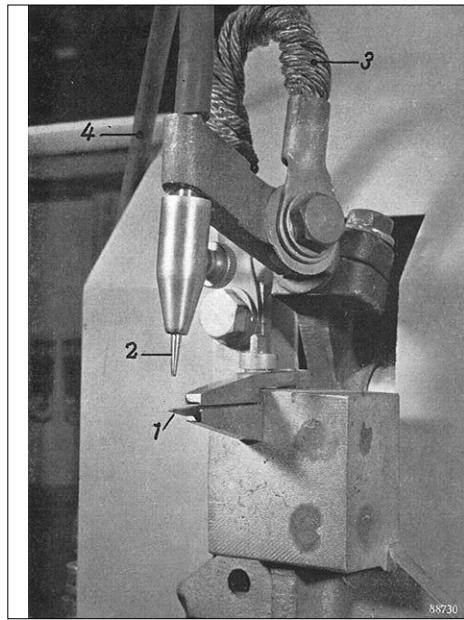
Spot-welding machine at Philips. Item 1 is the fixed electrode; 2 is the movable electrode with power supply 3. A reducing gas mixture ($H_2 + N_2$) is fed through hose 4. Source: [1].
